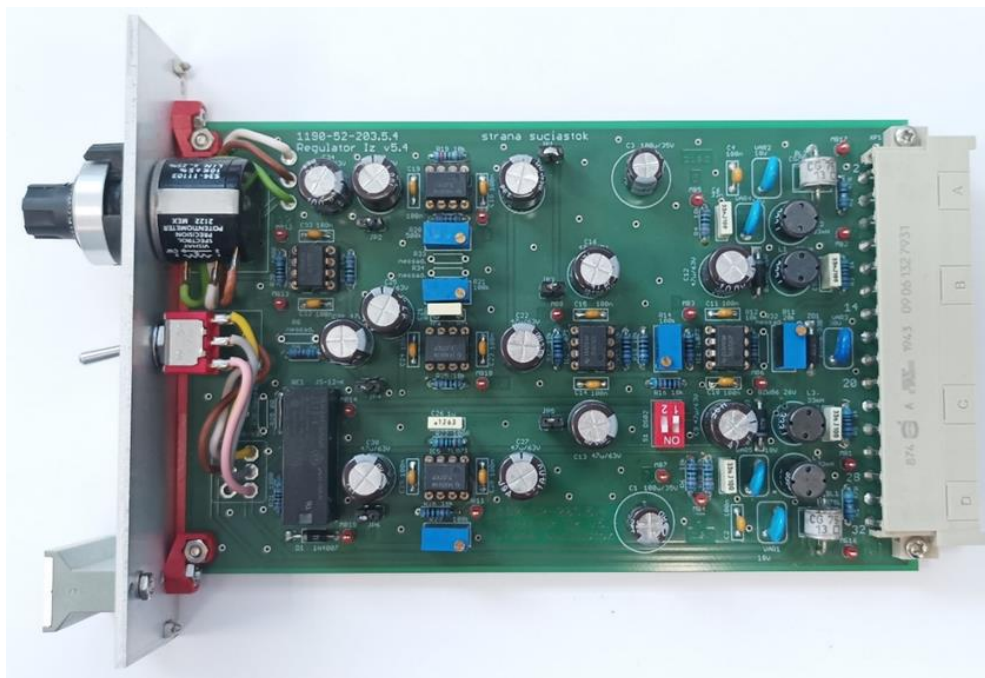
Circuit board of the welding current regulator with higher control dynamics
